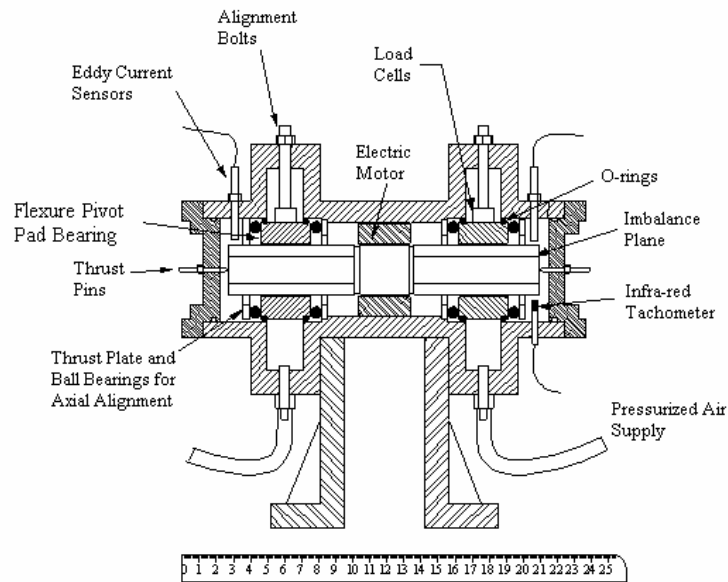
Schematic cross section view of gas bearing test rig (Unit: cm)
